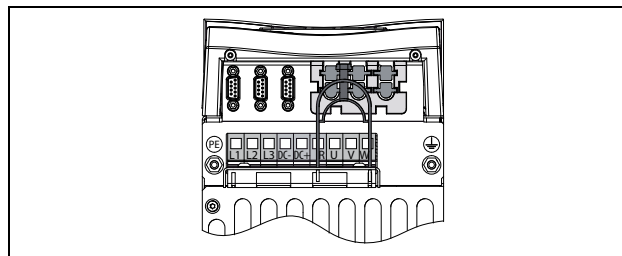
Bottom view Emotron FLD Model 48-025 to 48-058 (Frame size C2), with cable interface for mains, motor, DC+/DC-, brake resistor and control
